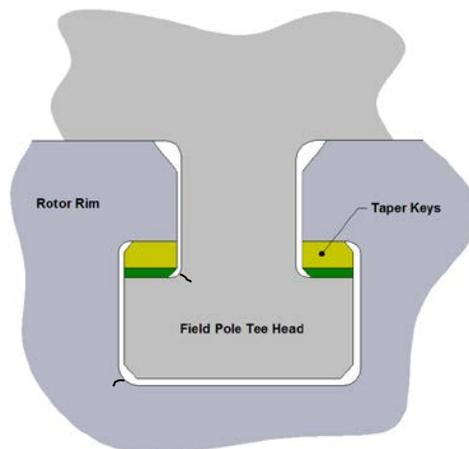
above shows a Tee head attachment of the rotor pole to the rotor rim.
